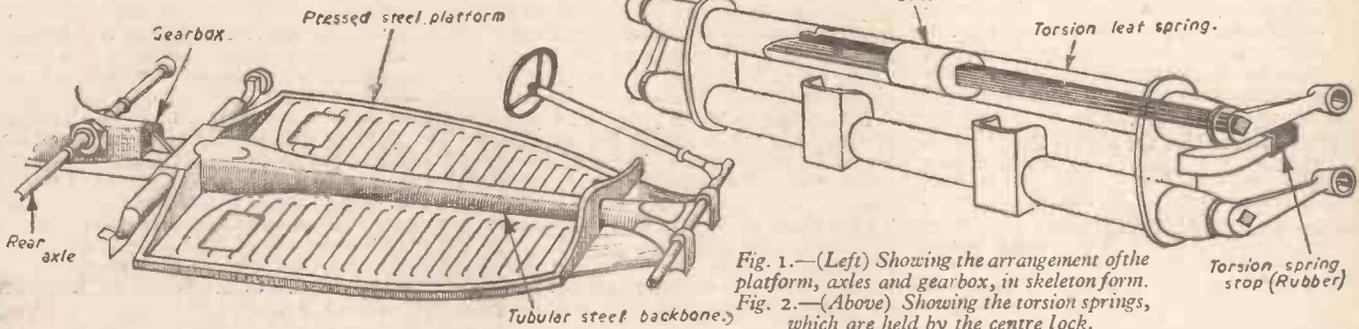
(Left) Showing the arrangement of the platform, axles and gearbox, in skeleton form.
